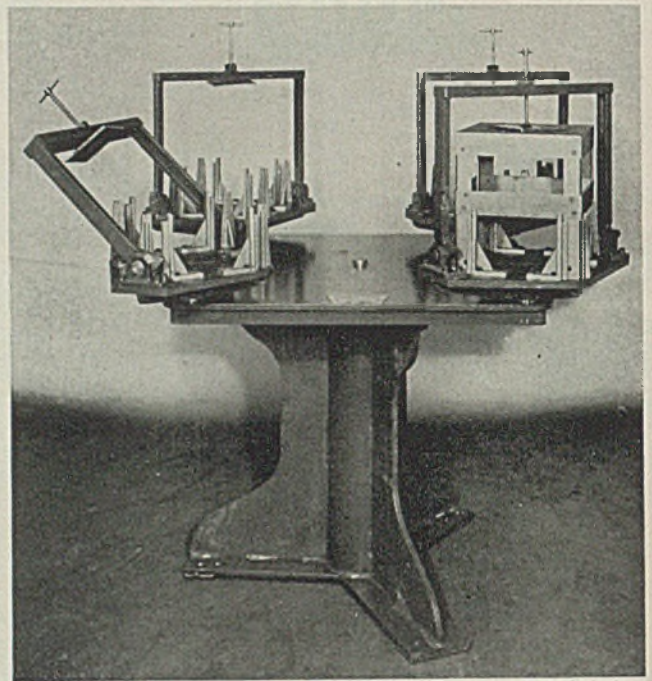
(Above)—Top of this table revolves and each fixture revolves, affording two welding stations as well as an unloading and a loading station for assembly of crates similar to those shown in Fig. 1 but made using portable "pinch" guns
